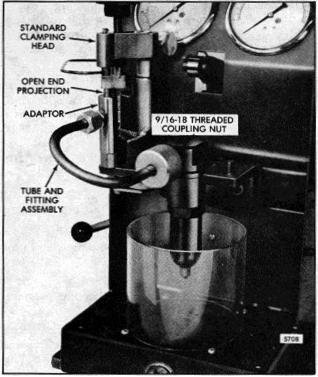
Adaptor and Tube Assembly on Injector Tester J 23010
